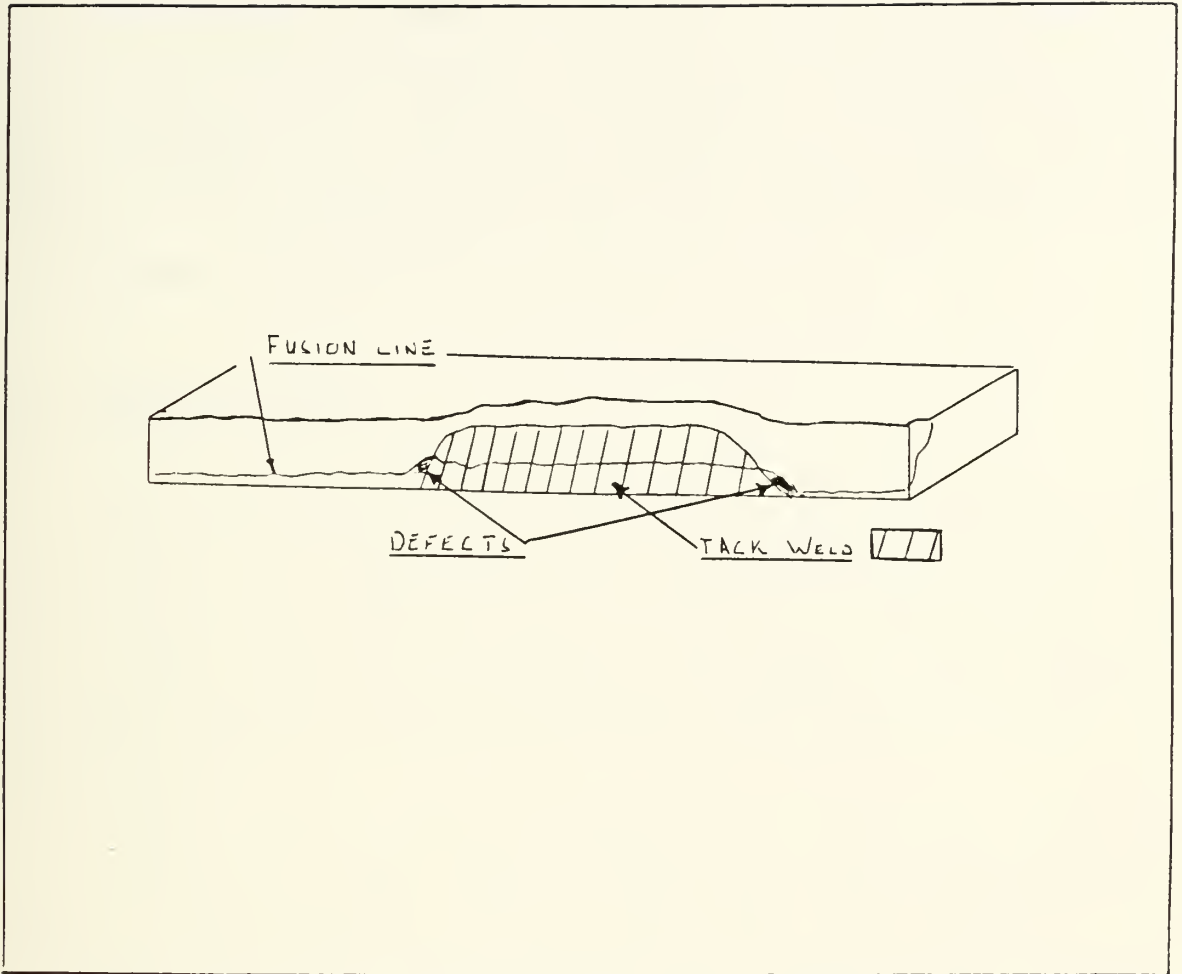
Longitudinal cut through a tack weld showing defects.
